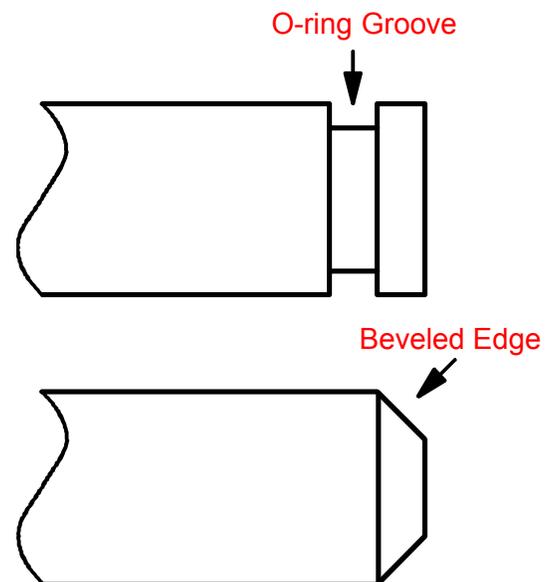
Two examples of short surfaces. O-ring groove (top) and beveled edge (bottom).
